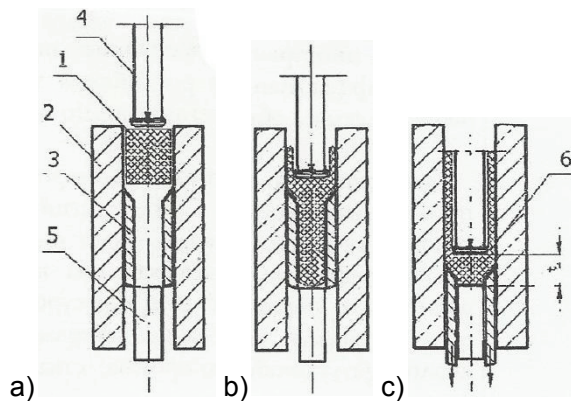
Schematic diagram of the sleeve manufacturing through the mixed extrusion technique using movable ring in the container 1) cylindrical work piece; 2) container; 3) ring; 4) punch; 5) pusher; 6) blank
